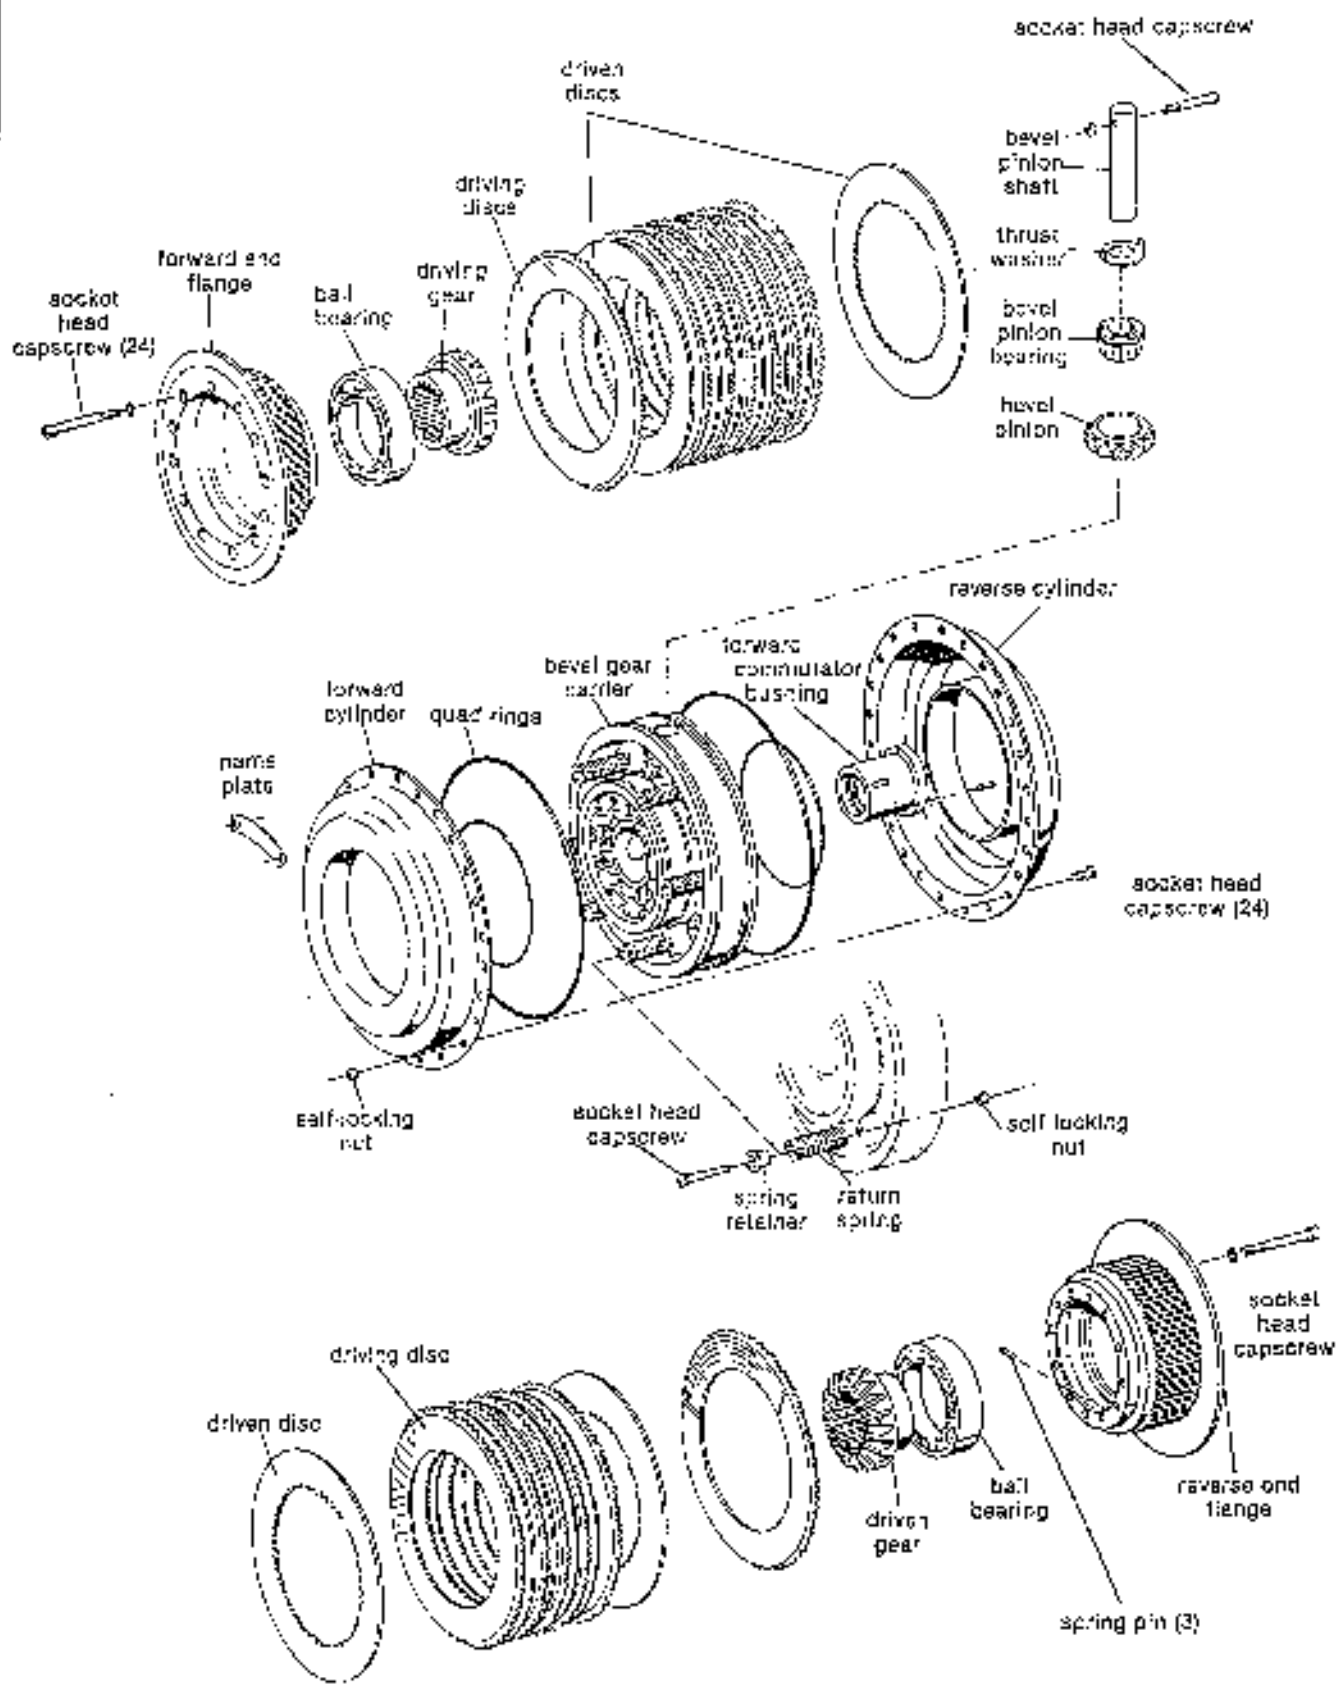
Clutch and Gear Carrier (HY-400 Clutch No. 1-00100-6000 Shown)
